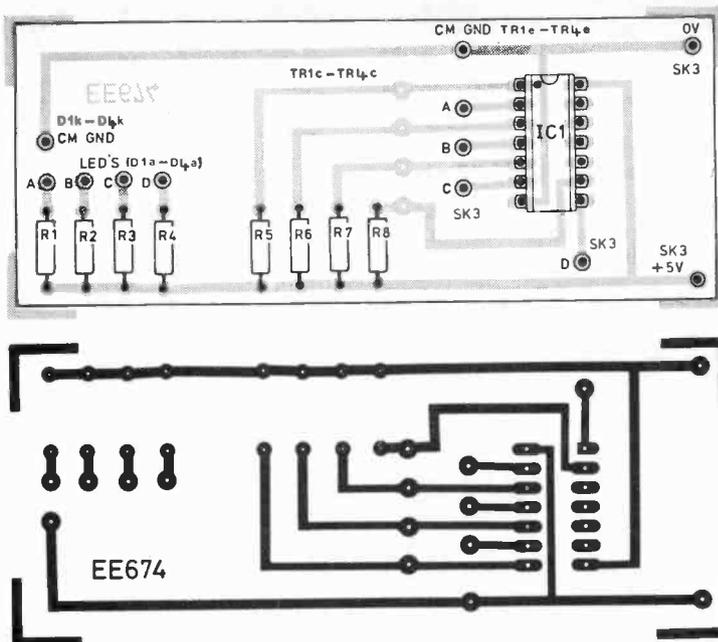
Printed circuit board component layout and full size master pattern for the wind vane head.
